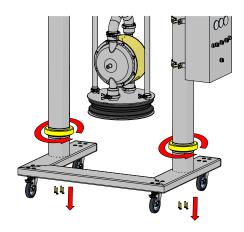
Lock the wheels, dismount the nuts with use of copper hammer. Unscrew 8 pcs. Allen screws from the base plate.
